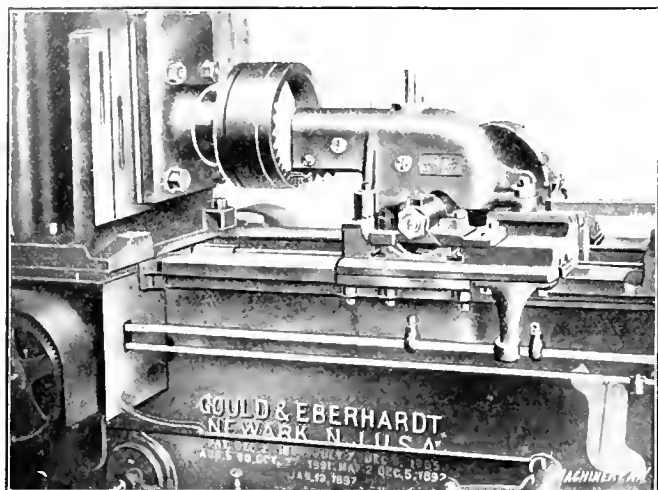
Attachment to the Gould & Eberhardt Gear-cutter for Cutting Internal Gears.
